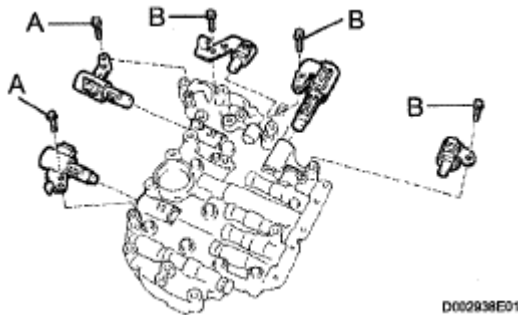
Identifying Shift Solenoid Valves With 5 Bolts
